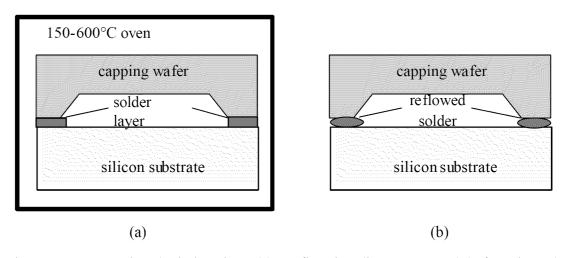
Drawing depicting the solder reflow bonding process (a) before the solder was brought to its melting temperature, and (b) after the solder has been reflowed (melted) and cooled.
